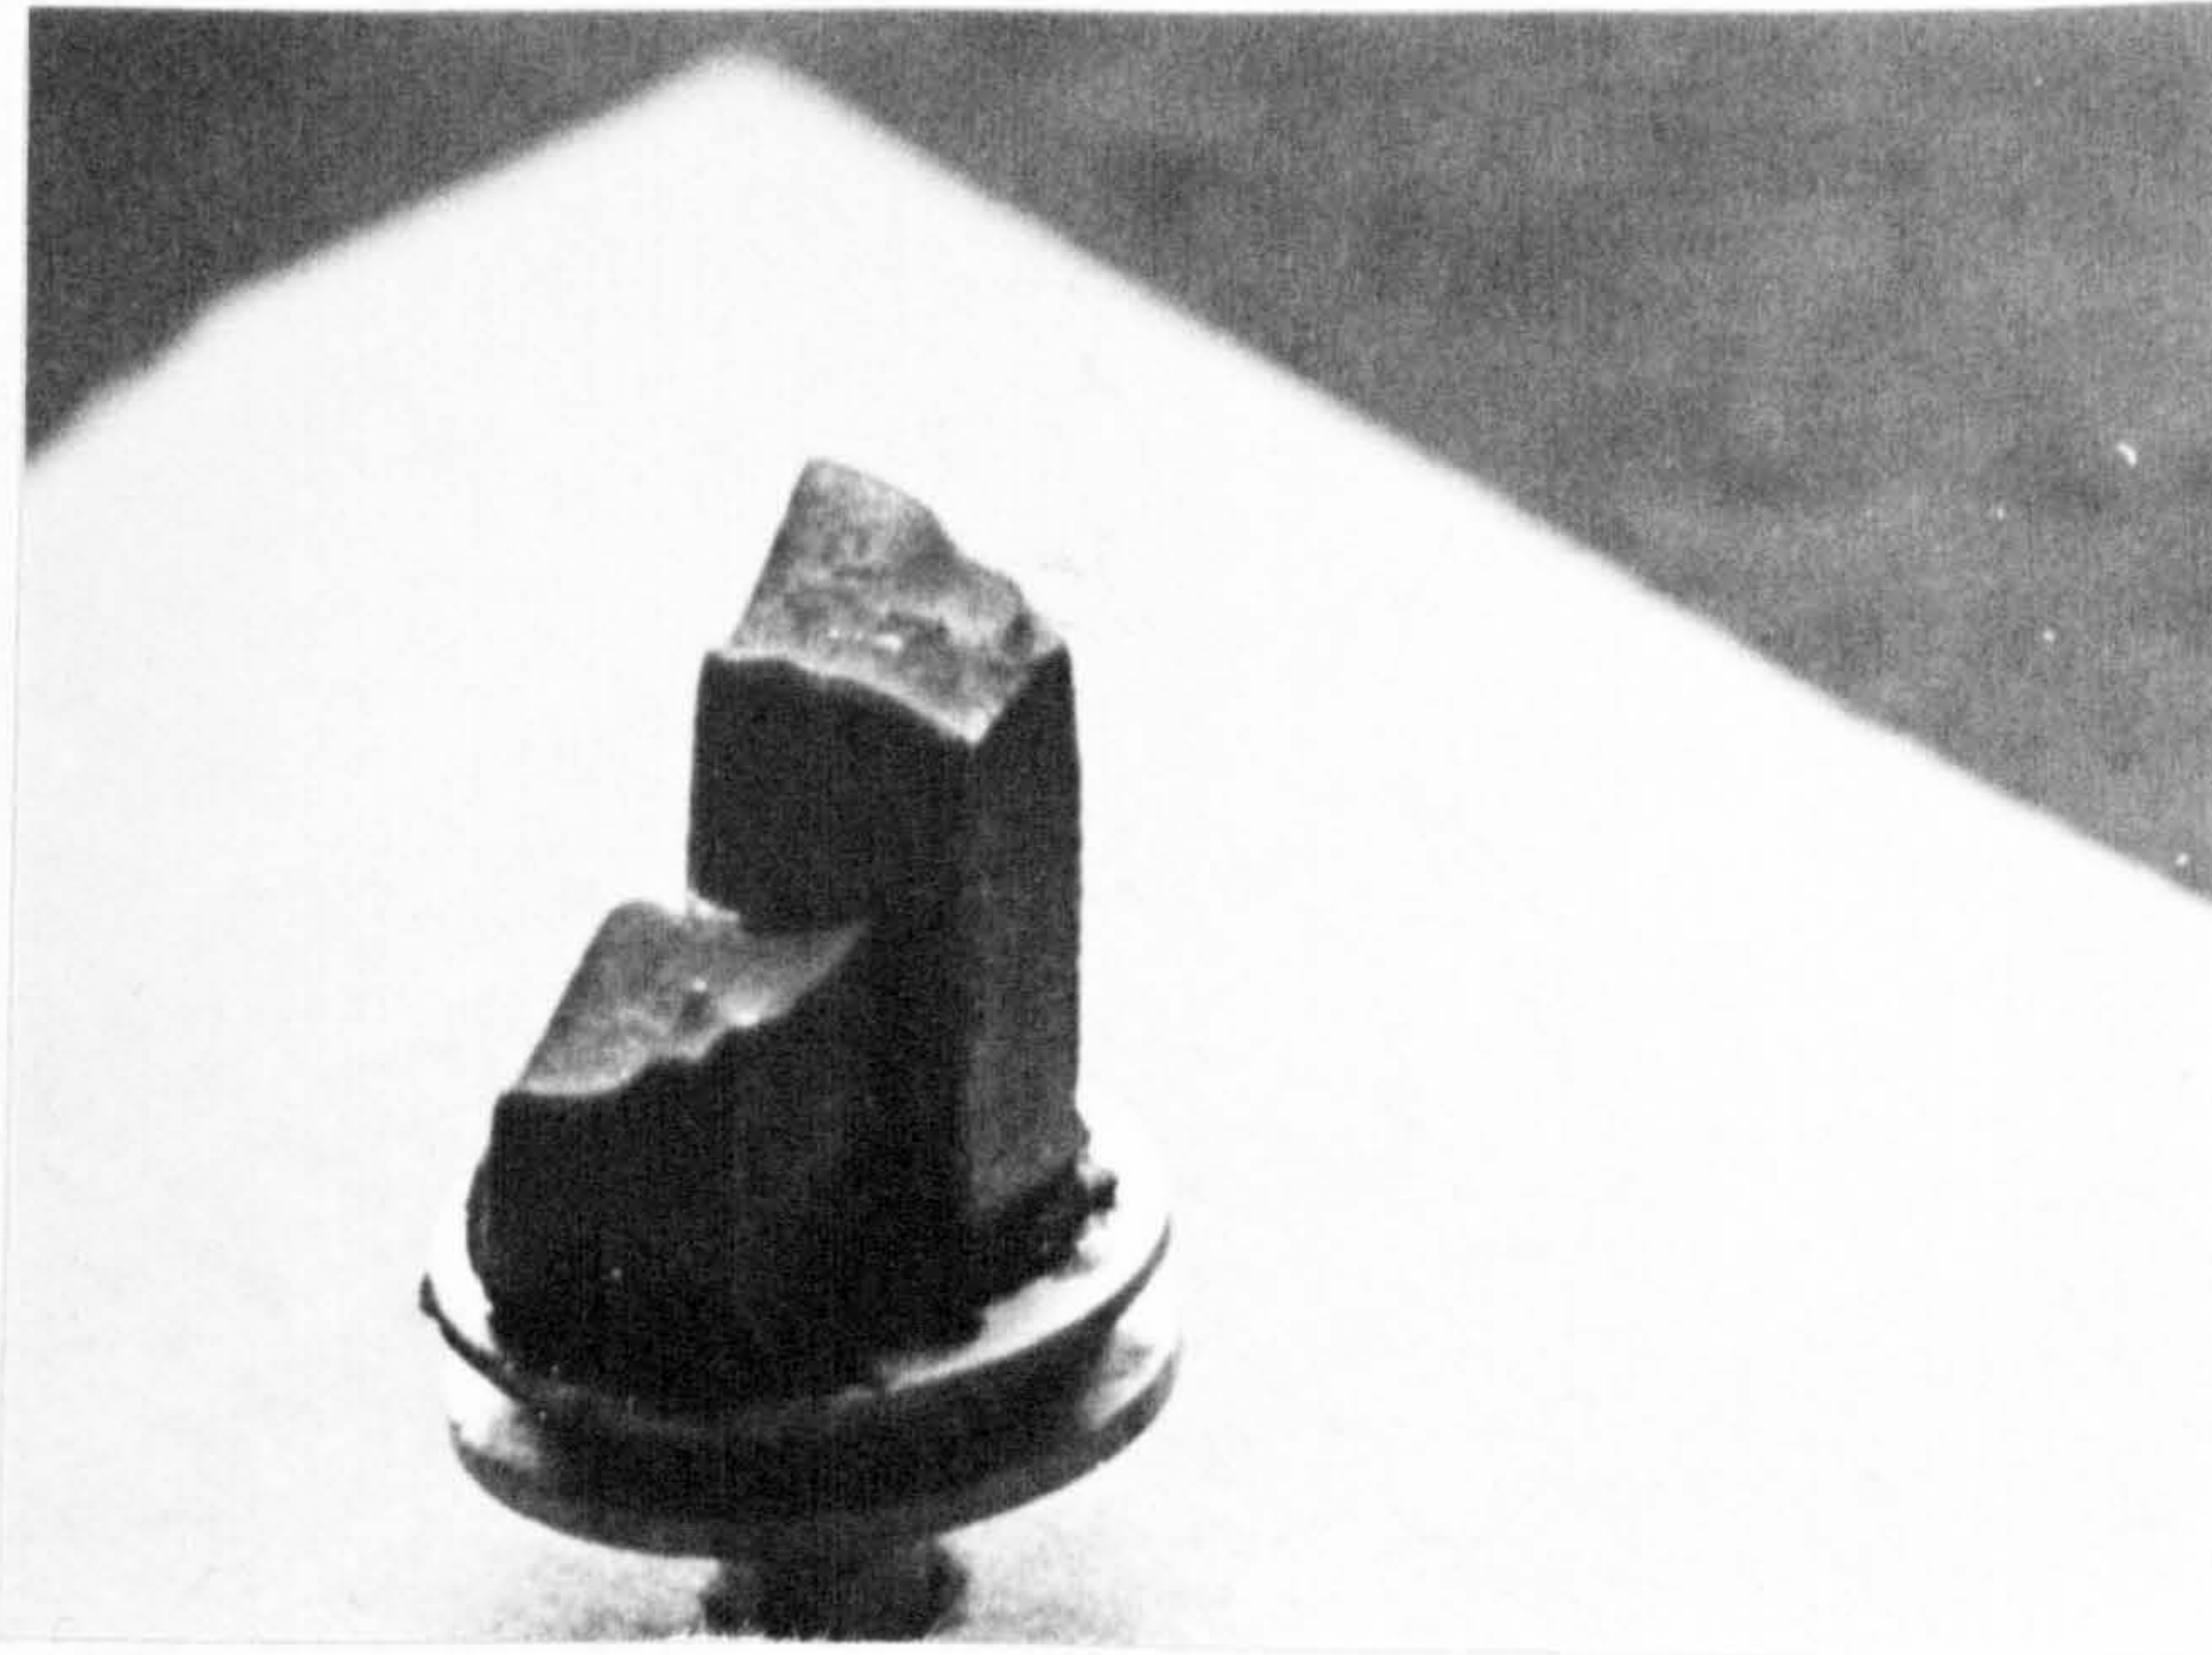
(a) Photograph showing the fracture surface of virgin Supral 150 tensile test specimen. Note the 45° Shear fracture surface.
